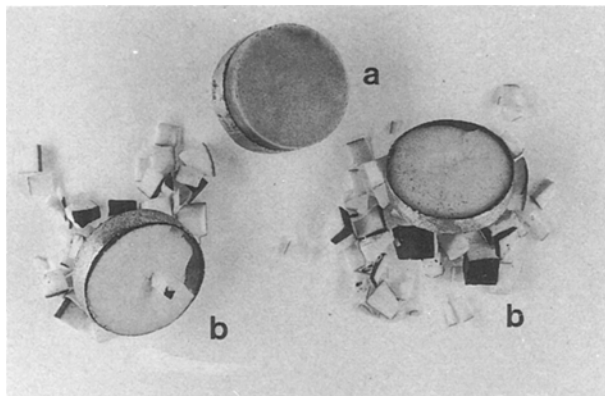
(a) Specimens used in the impact tests. (b) Specimens after the impact tests, which show that there are no cracks in the welded area
